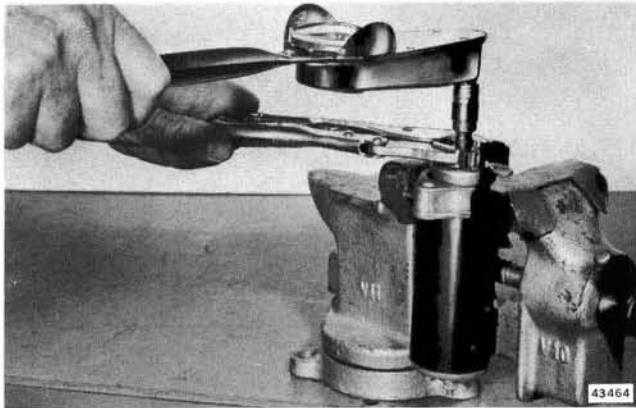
Torquing Pinion Nut to 150-170 Inch-Lbs (17-19 N·m)
